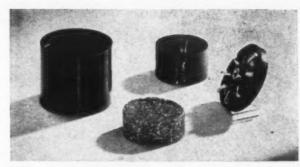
COMPONENT, shell, epoxy pellet and header assemble into sealed encapsulated unit.
